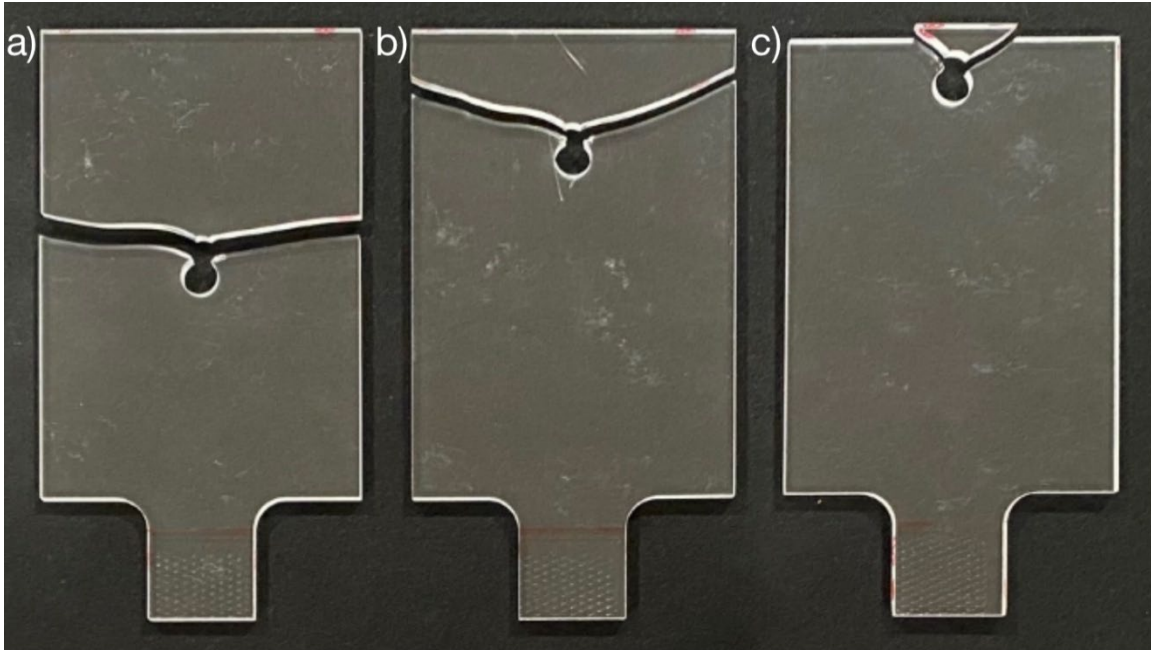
Specimen fracture with 5 mm bolt: a) P4, b) P5, and c) P6
